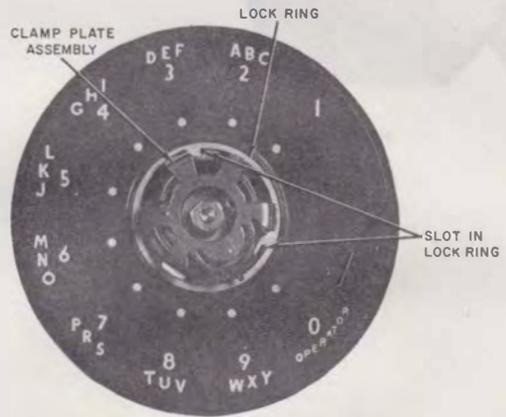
Fingerwheel and Finger Stop Removed to Show Lock Ring
